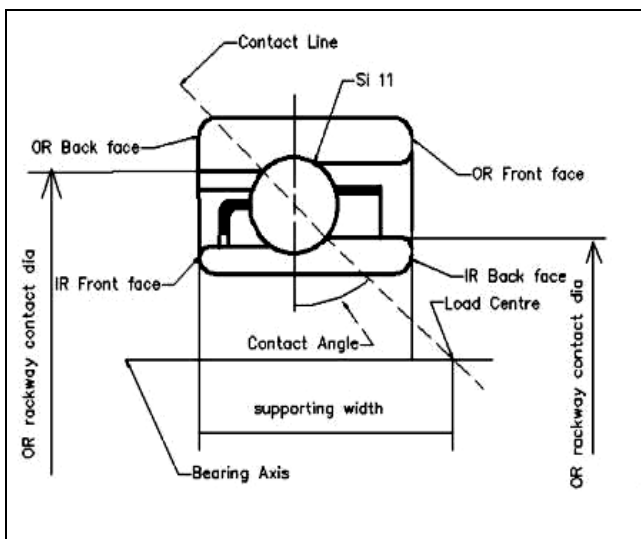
Sketch showing different terms used in Angular Contact Ball Bearing
